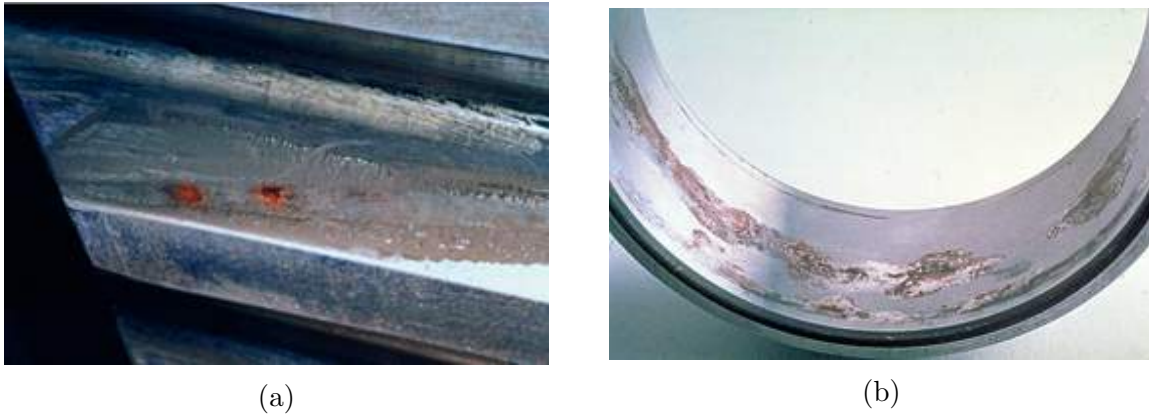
False brinelling of planet gear teeth (a), source: [50]. Fretting corrosion of bearing inner ring (b), source: [51].
